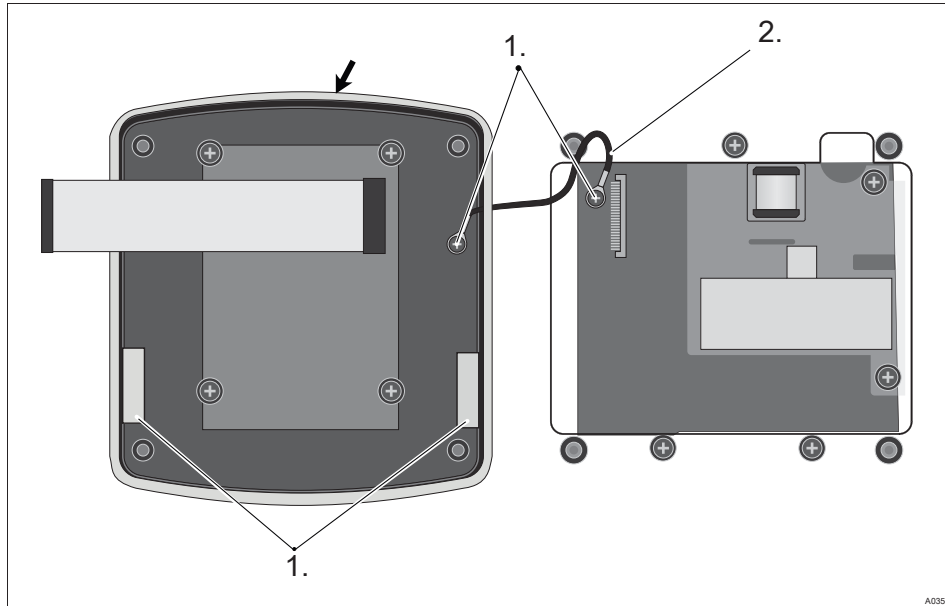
Fitting the profile seal onto the top section of the controller housing
